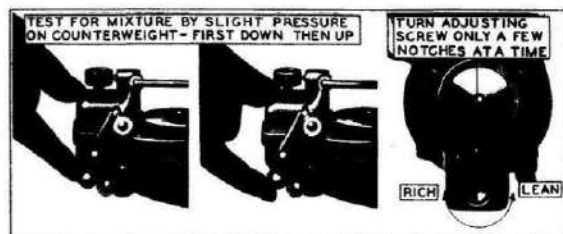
The principal carburetor adjustment is the auxiliary air valve. This should be done with the spark retarded and the hand throttle in the idling position.
